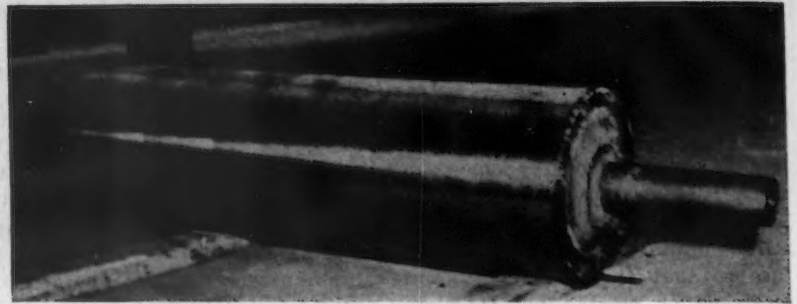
Aluminum bronze horizontal centrifugally-cast roll used in a tin mill.
